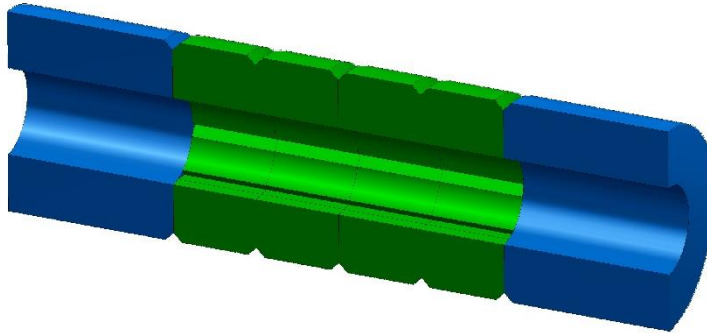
Longitudinal section of the plasticizing system equipped with four rotational barrel elements with a grooved inner surface, without a screw
